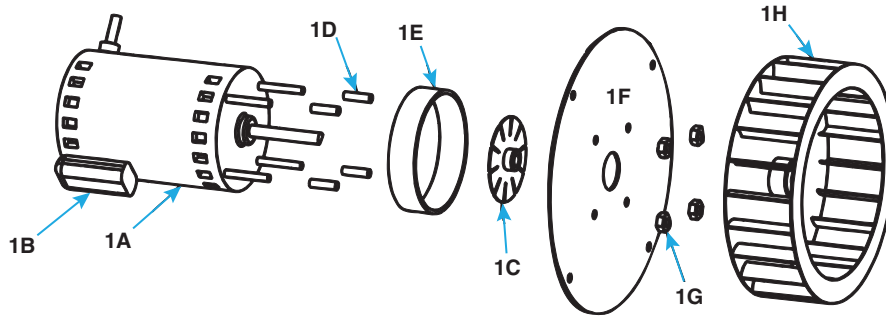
Venter Motor and Wheel Assembly (Refer to Table 18)
